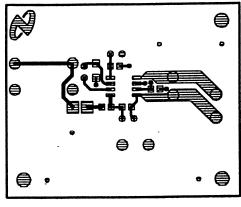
REFERENCE DESIGN BOARD and PCB LAYOUT GUIDELINES
